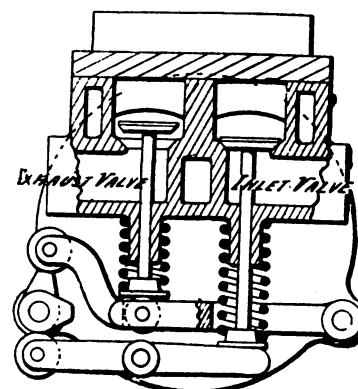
SECTION THROUGH VALVE CHAMBERS.
